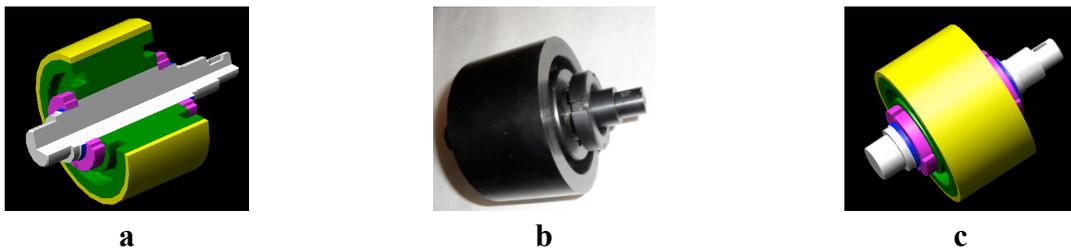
Variant F₁₁₂ – Cylinder + fixed on the drum shaft + screw nut + thread shaft:
